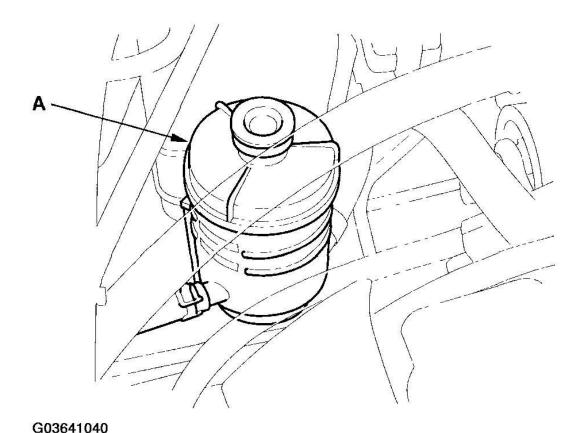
Identifying Reservoir Courtesy of AMERICAN HONDA MOTOR CO., INC.
